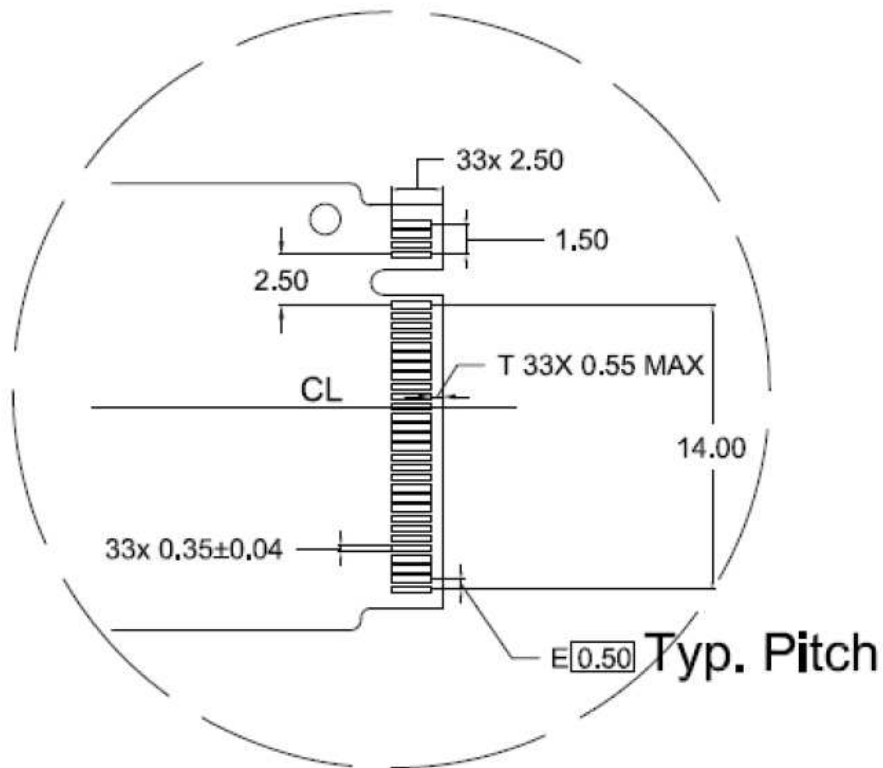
Dimension Details for M.2 card edge (Bottom View)
